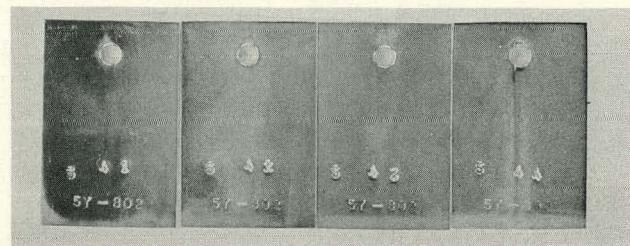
Typical Surfaces of Specimens Which Were Rinsed in
